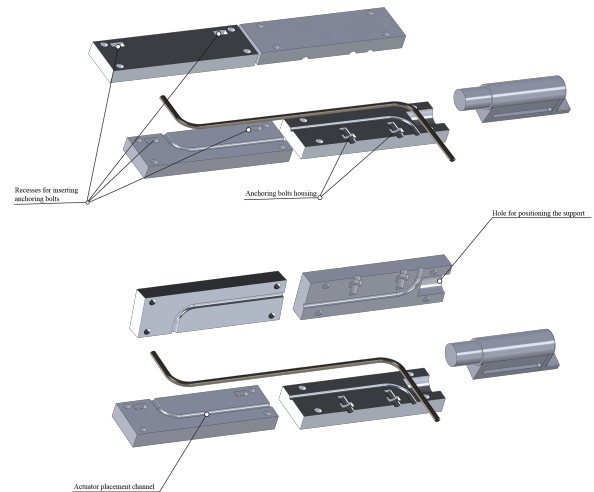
3D model and exploded view of the ASA Hinge Mechanism
